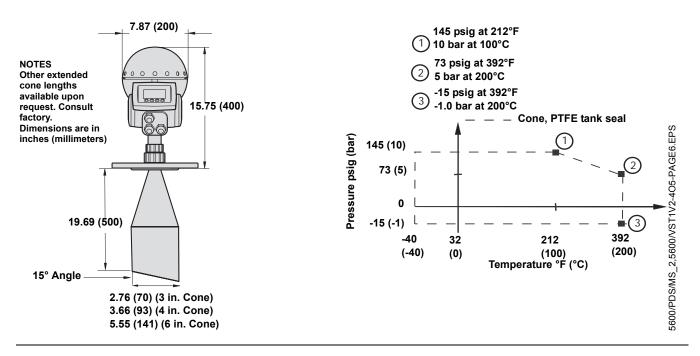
Cone with Integrated Flushing Connection Dimensions for Stainless Steel Flange
